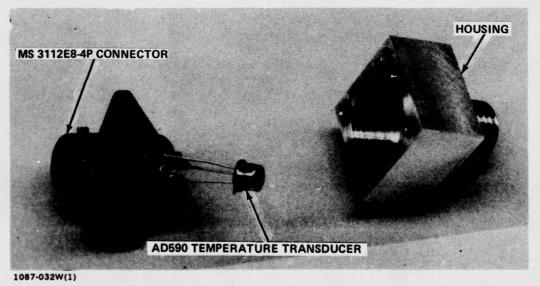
Temperature transducer assembly. (Sheet 1 of 2)
